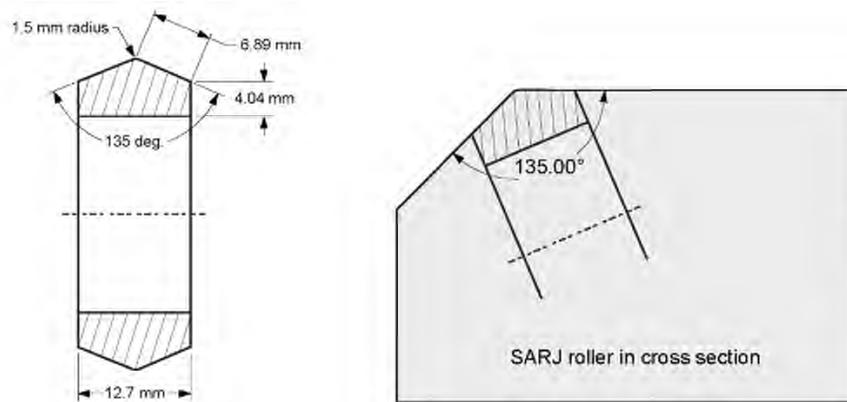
Cross section of the “blend radius” roller and overlay of the roller shape on the SARJ roller cross section in the chamfer radius region.
